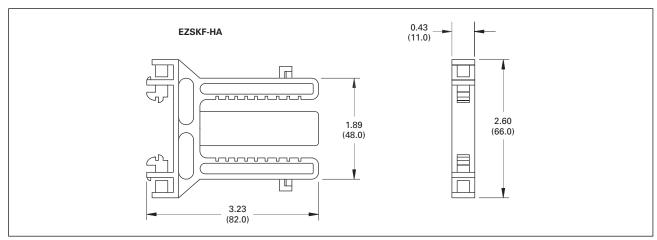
EZSKF-HA Series Dimensions in Inches (mm), Drawing Number MD05013015E
